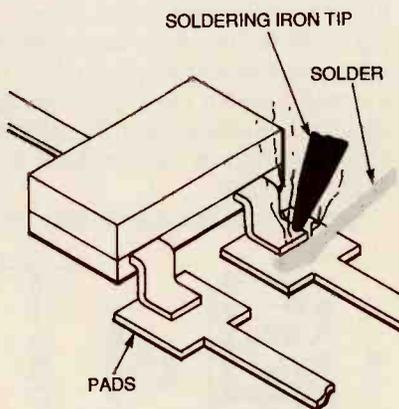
To solder gull-wing leads to a PC board, use a 63/37 tin-lead solder that is 0.015 inches in diameter, and a conical soldering-iron tip that is 1/16 of an inch or less in diameter.
